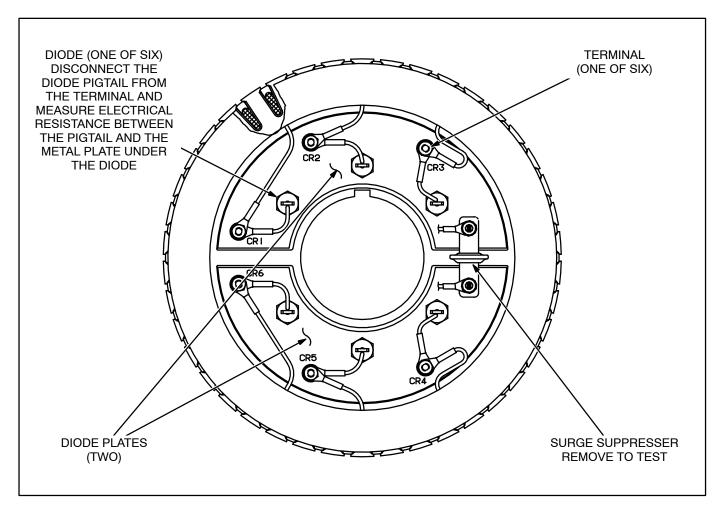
TESTING THE ROTATING RECTIFIER ASSEMBLY
